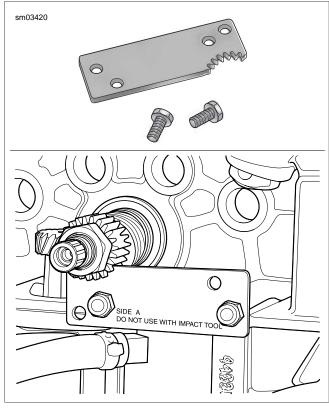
Crankshaft Locking Tool (Part No. HD-43984)
